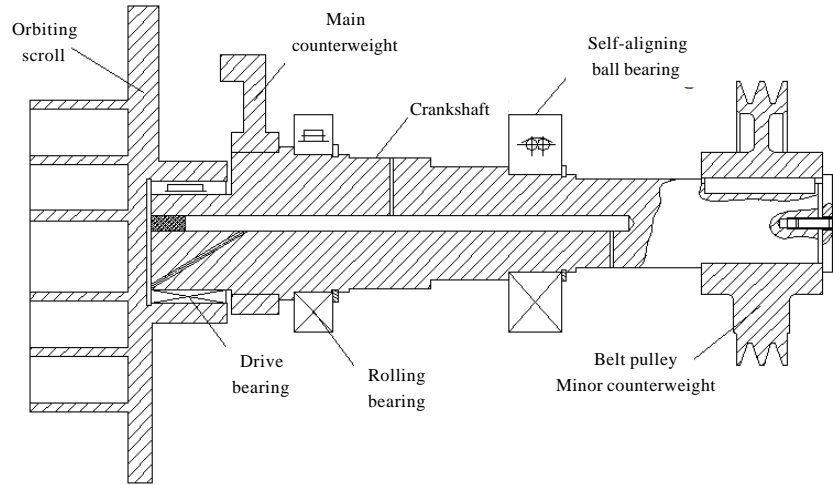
Crankshaft rotor structure diagram of scroll compressor
